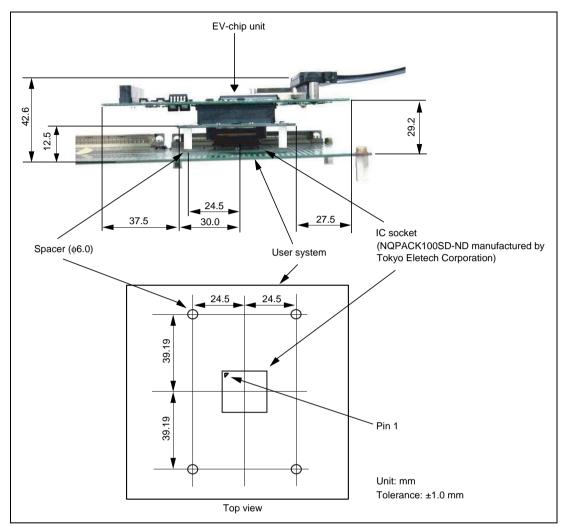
Resulting Dimensions after Connecting User System Interface Board (when Connecting EV-Chip Unit)
